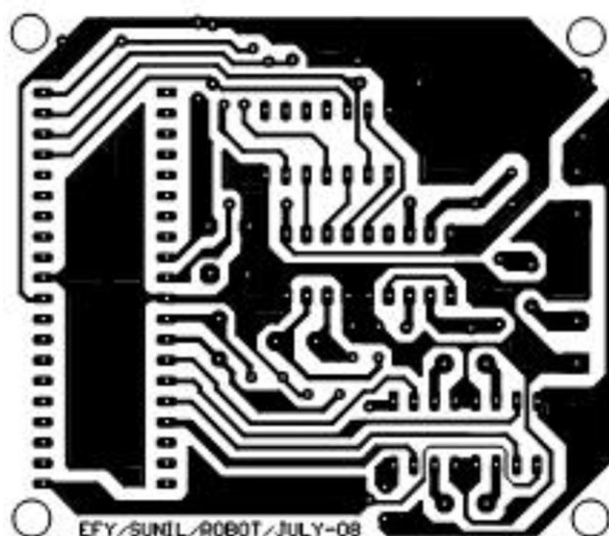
An actual-size, single-side PCB layout for cellphone-operated land rover
